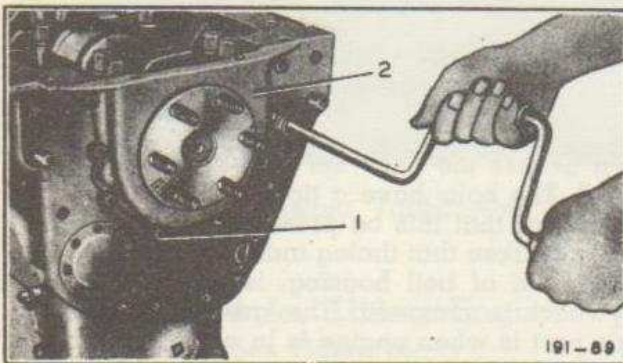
View Showing Removal of Capscrews from Oil Slinger Housing
